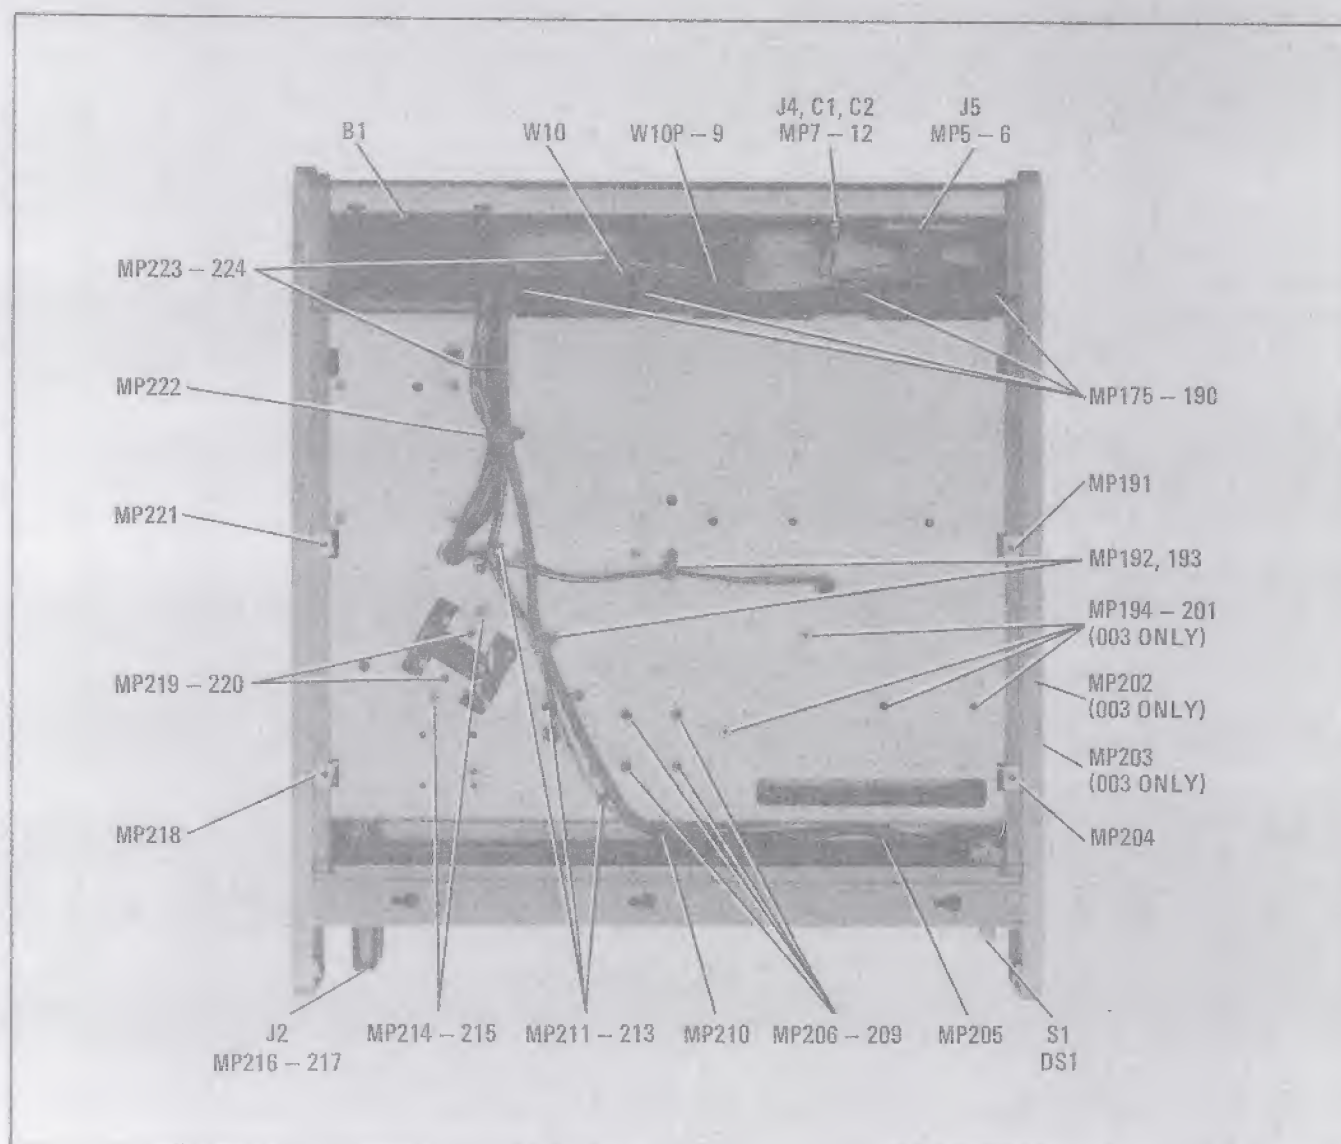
Mechanical Parts Identifiable From Bottom of Chassis
